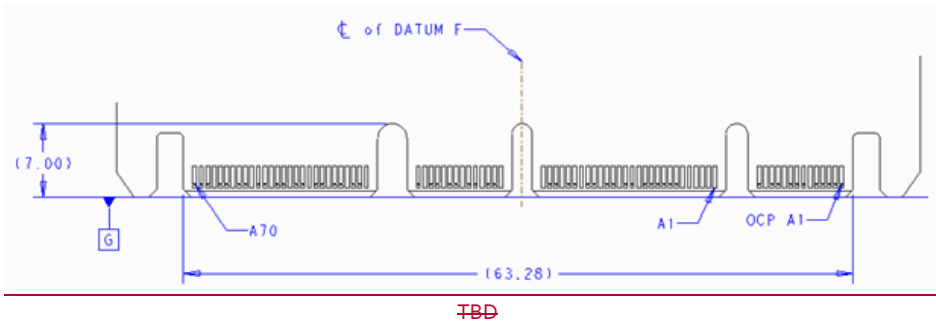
Large Size Card Gold Finger Mating Card Dimensions – x32 – Top Side (“B” Pins)
